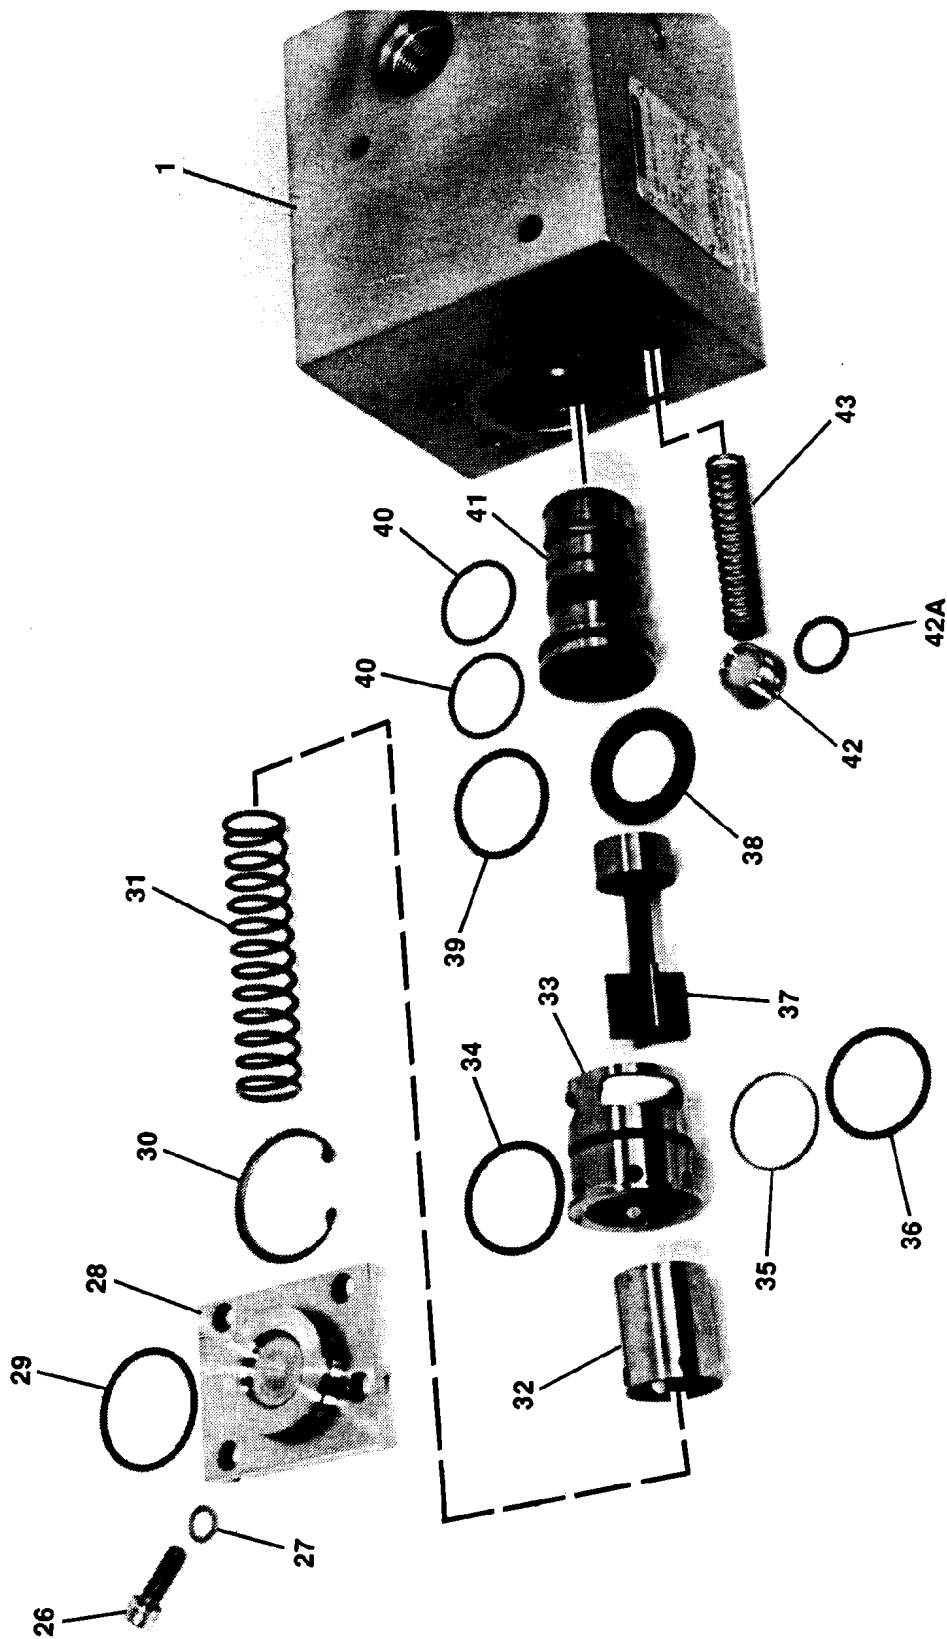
Liquid Fuel Shutoff Valve Exploded View
